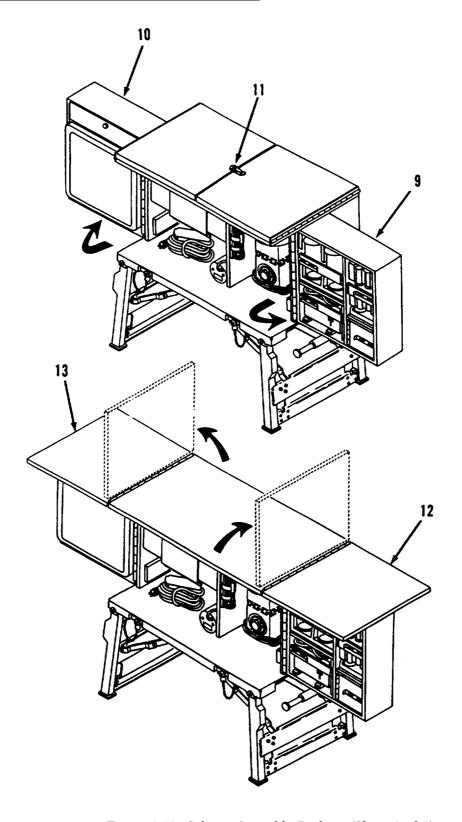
Cabinet Assembly Packing (Sheet 2 of 2).
